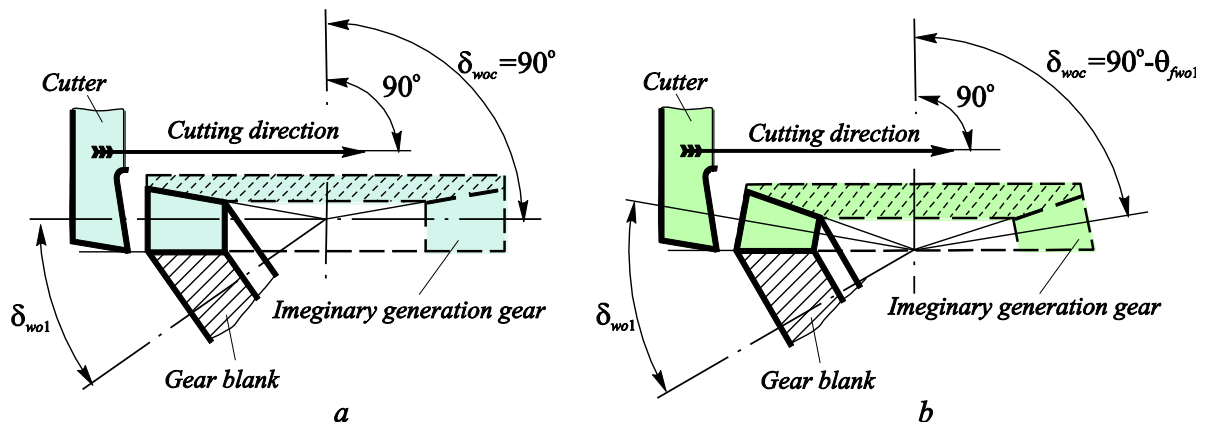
Generating process for bevel cutting: a – with flat generating gear; b – with flat-topped generating gear
